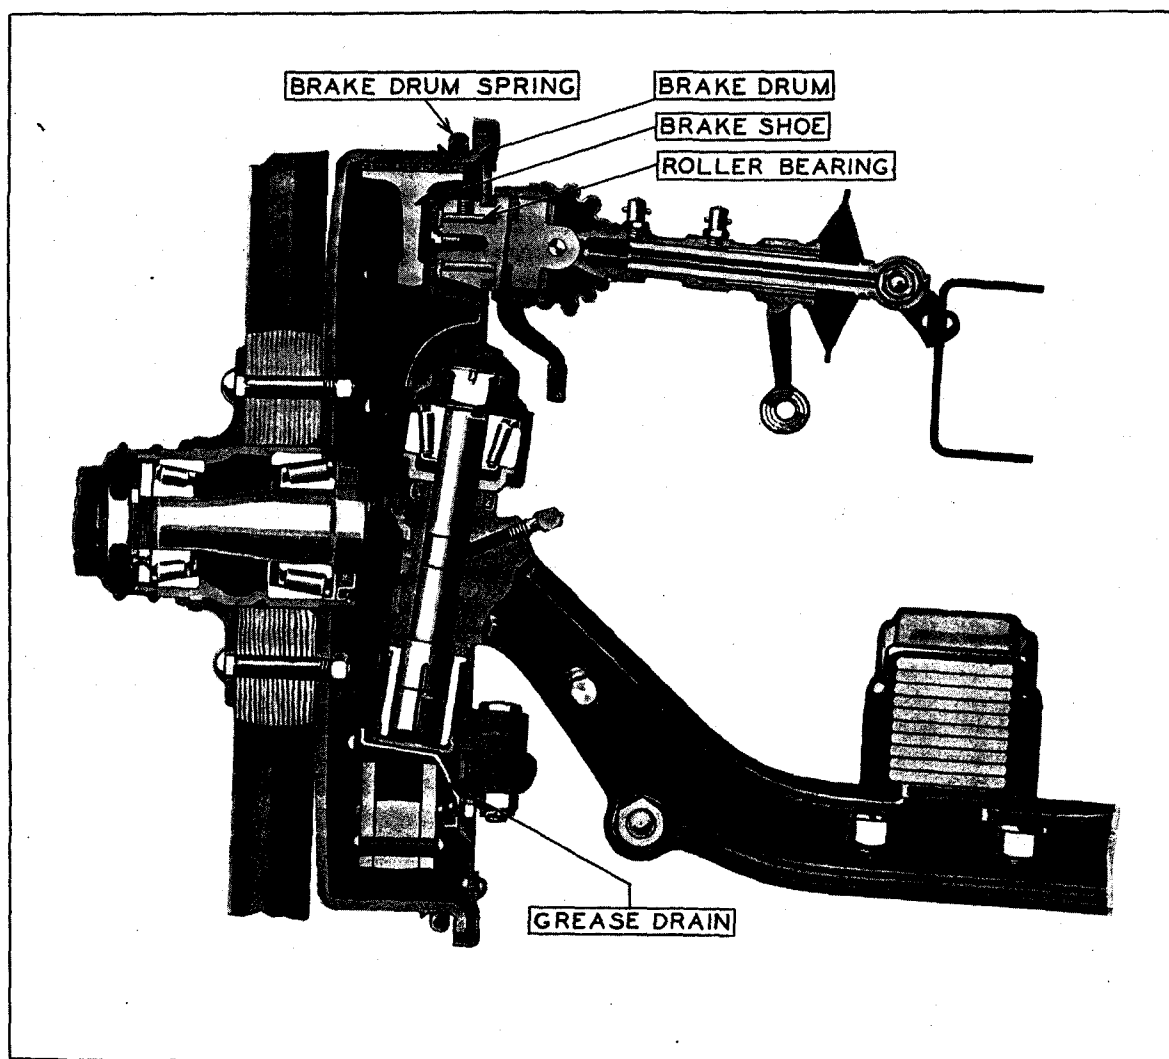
Sectional view of the Cadillac 341-B left front wheel and steering knuckle.
